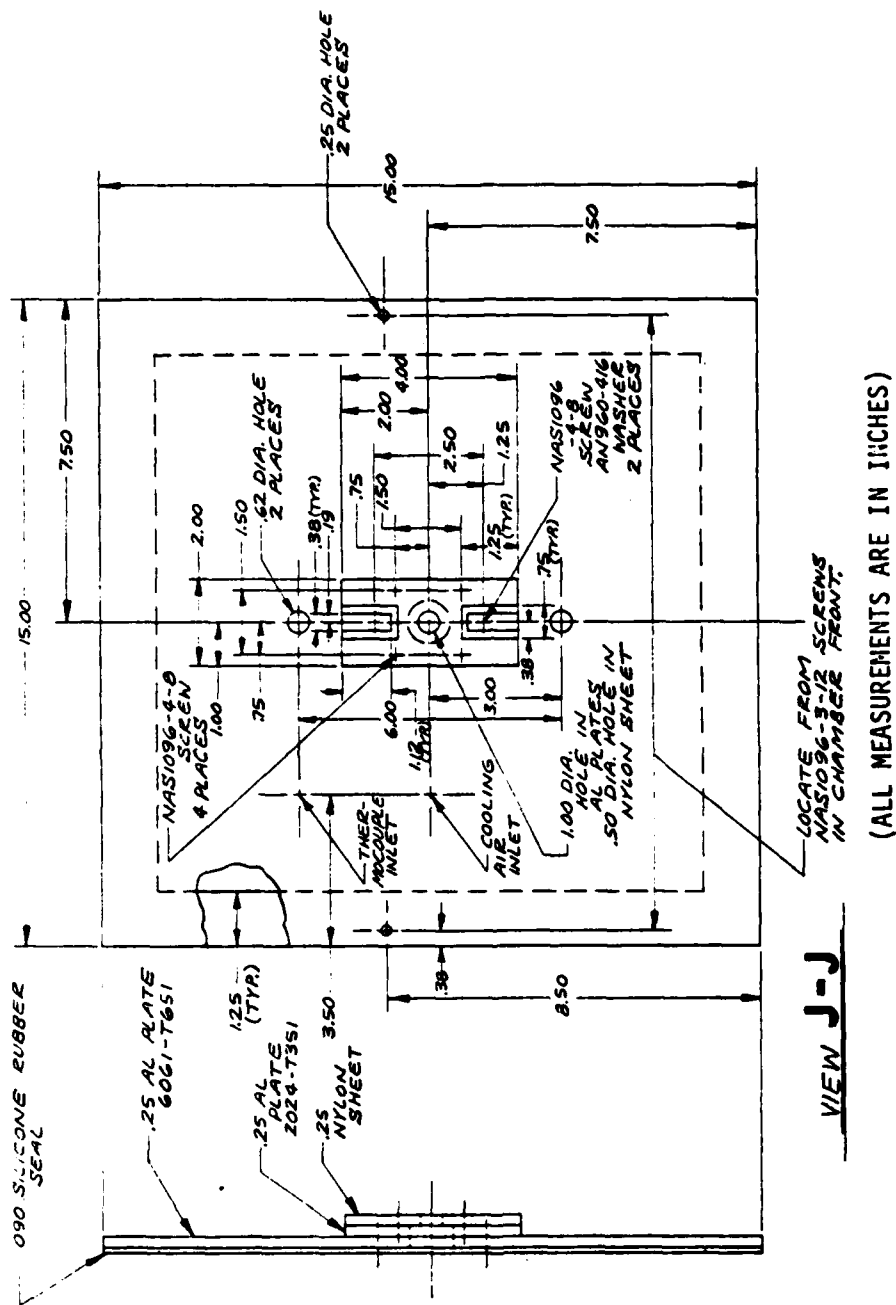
DETAIL OF SAMPLE HOLDER/INJECTION ASSEMBLY OUTER SEAL PLATE
